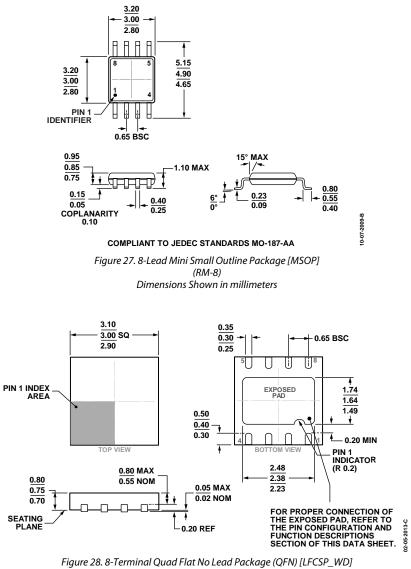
8-Terminal Quad Flat No Lead Package (QFN) [LFCSP_WD] 3 mm × 3 mm Body, Very Very Thin, Dual Lead (CP-8-3) Dimensions Shown in millimeters
